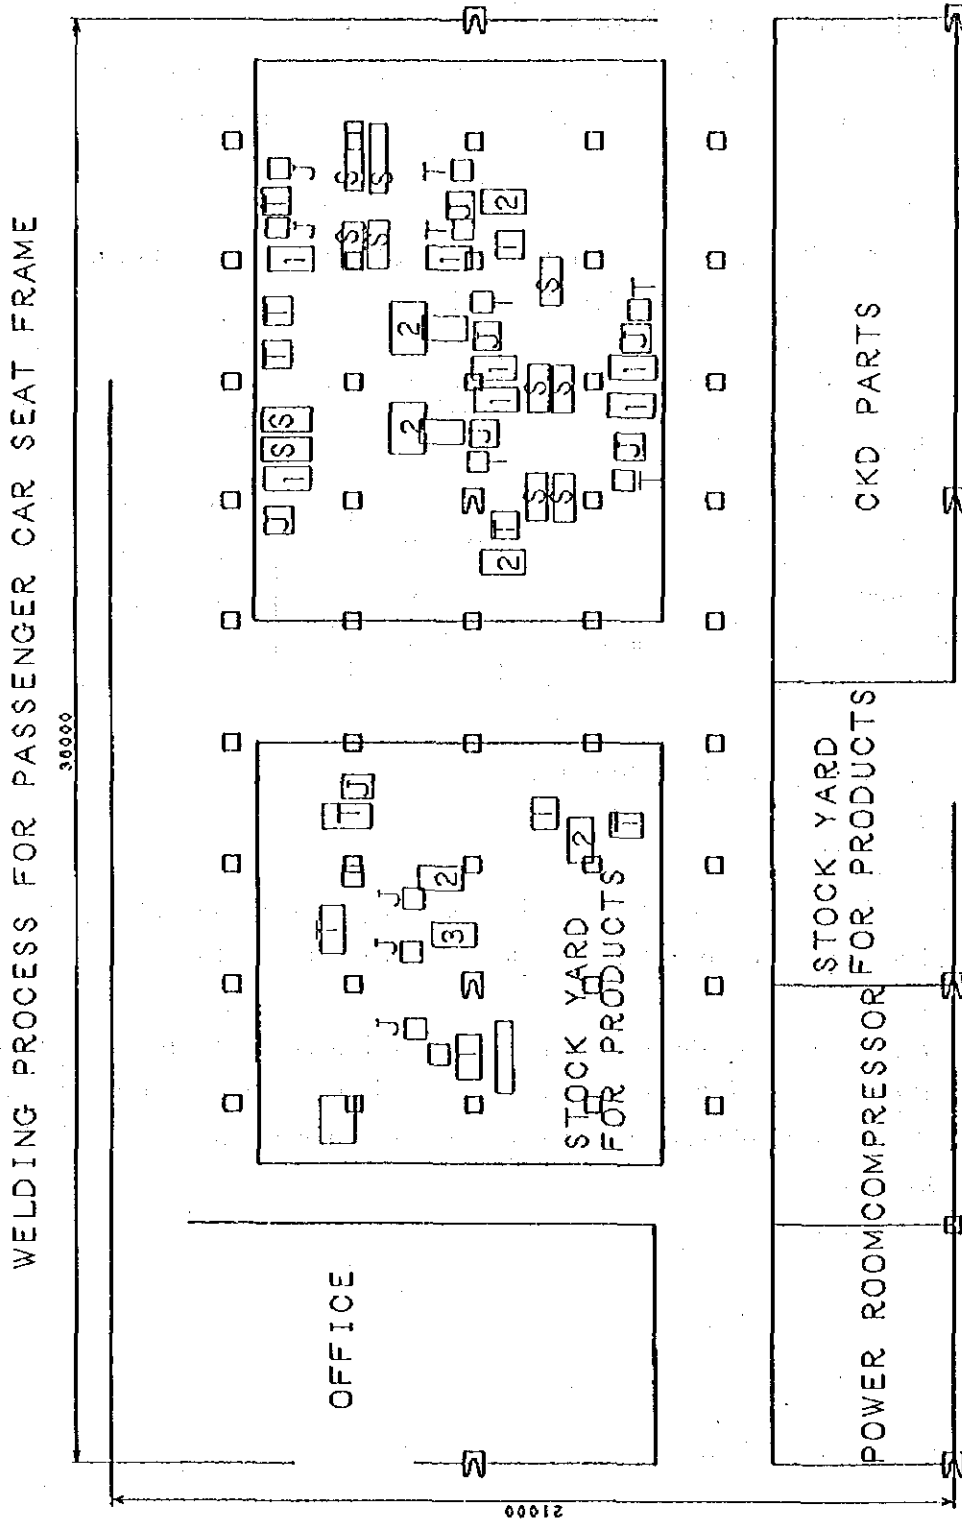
Layout Drawing of the Welding Process for Seat Frames for Passenger Cars
